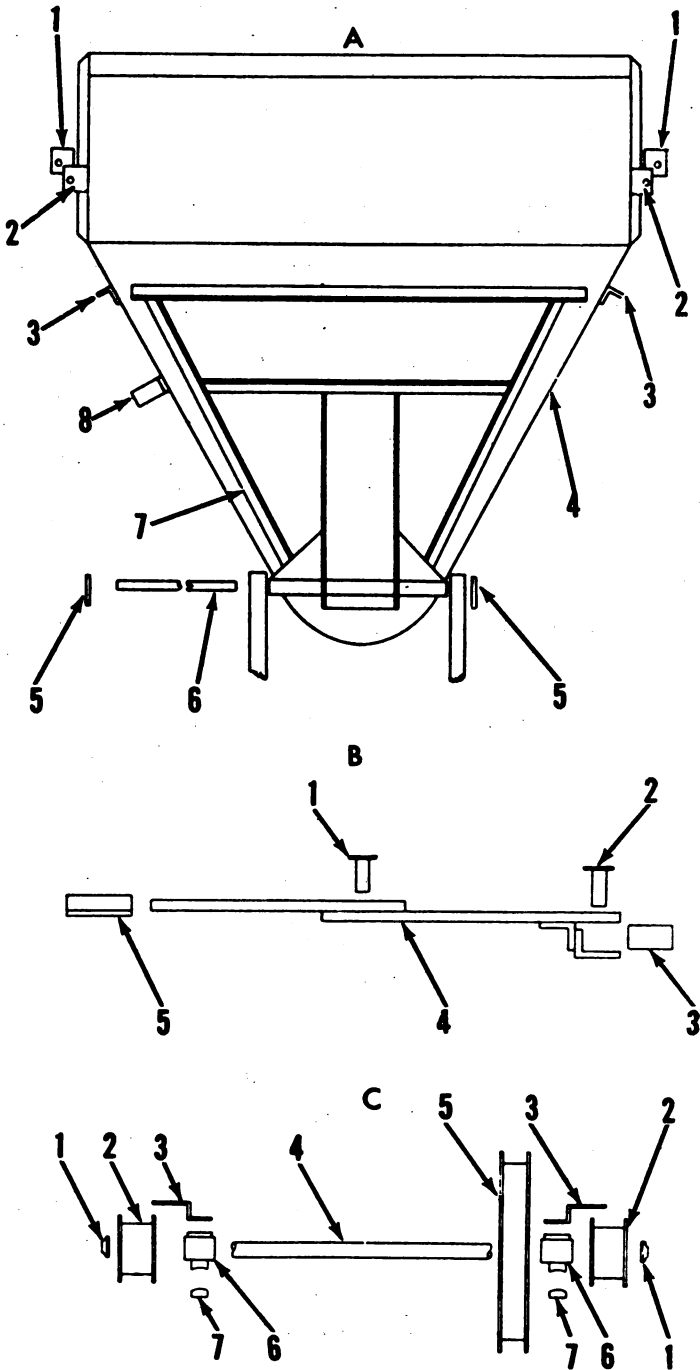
Skip assembly, shaker, and bull drum hoist shaft.
